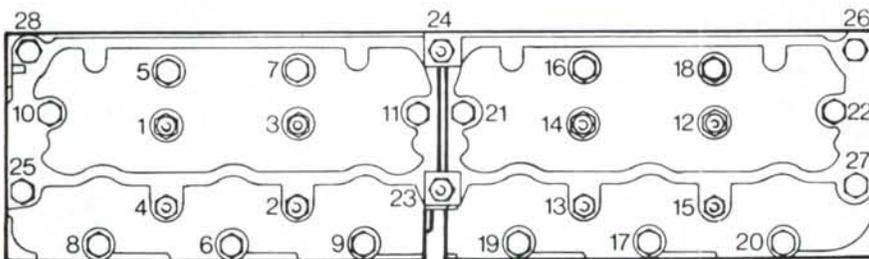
Use sequence shown when tightening head bolts on six-cylinder engines.
